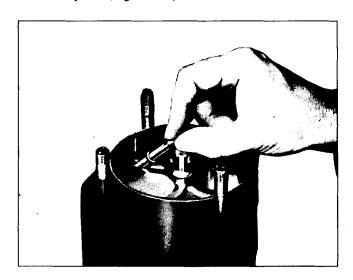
A-99 Installing Oil Intake (Pick-Up) Tube
